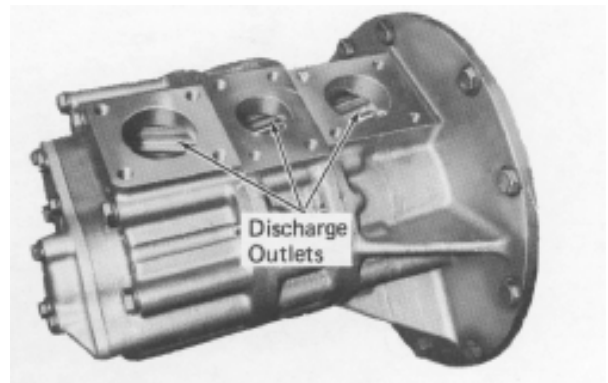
Scavenging Oil Pump (16 & 20-Cyl.)
